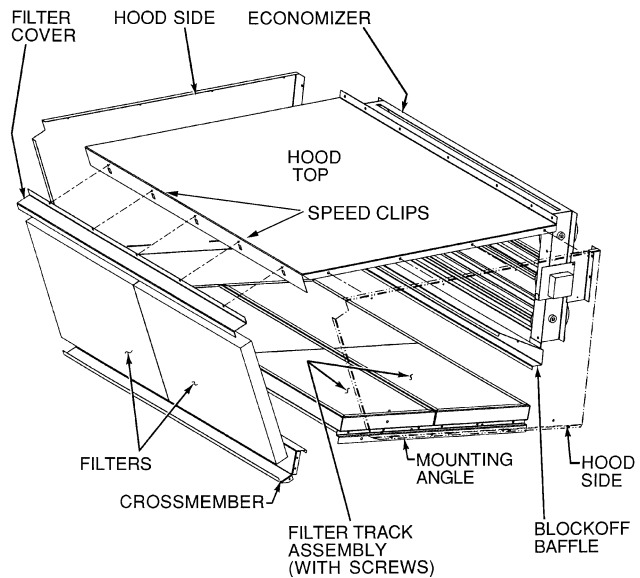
Economizer Hood Assembly (Right Side/Center Economizer Hood Shown)
